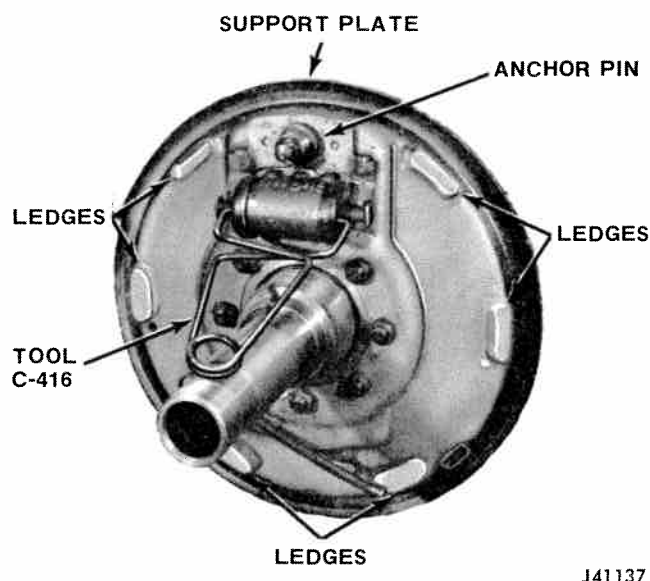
Disassembled Drum Brake Assembly - Cherokee, Wagoneer, Truck (Rear Brake Shown)
